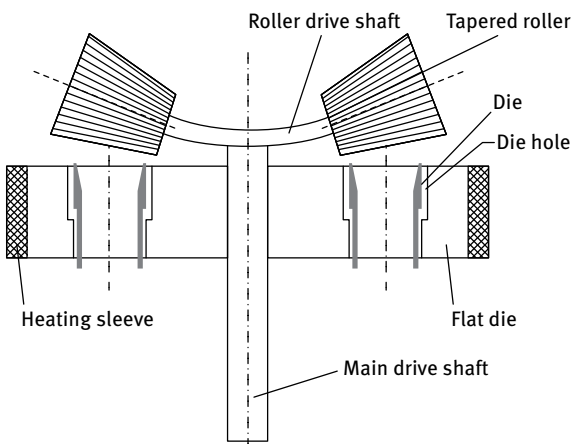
Schematic representation of tapered roller type briquetting machine.
